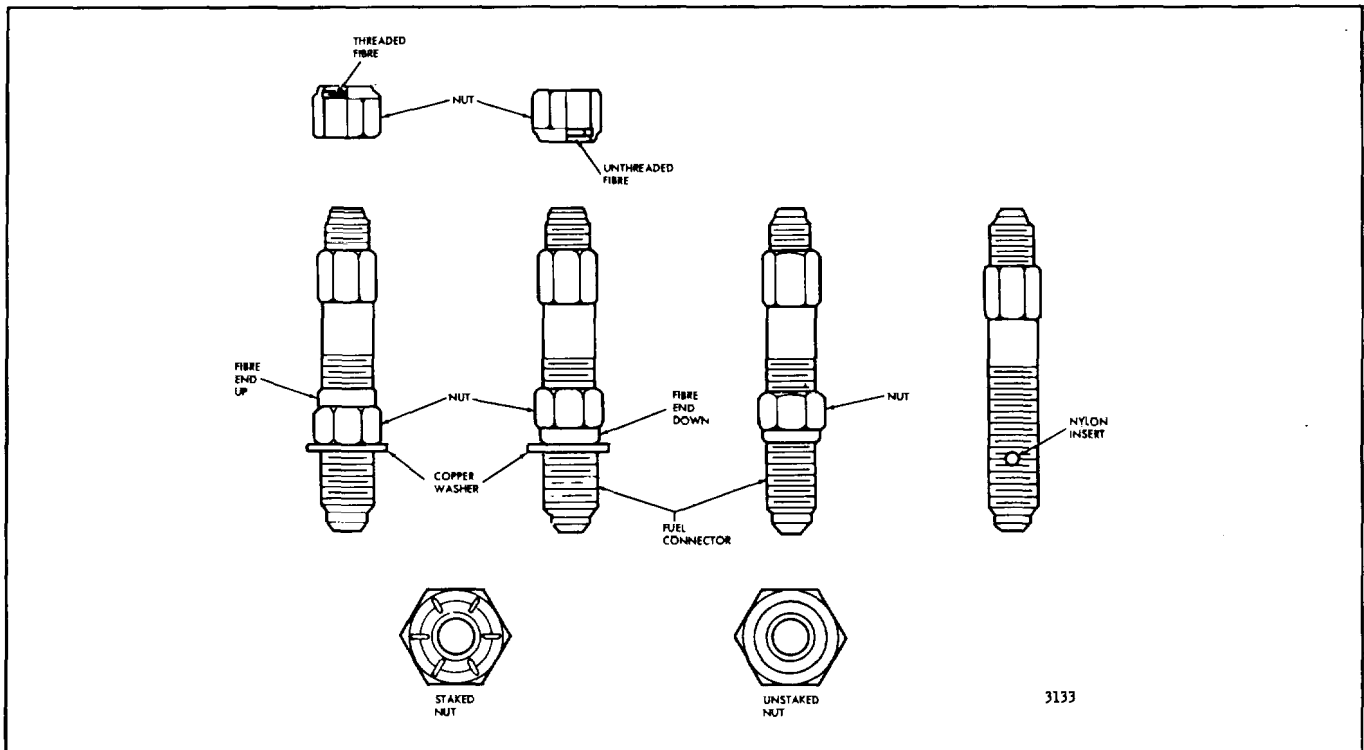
Fuel Connectors Used with External Fuel Manifolds
